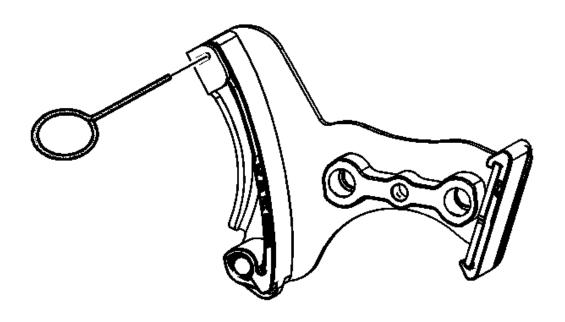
View Of Compressed Tensioner Courtesy of GENERAL MOTORS CORP.
